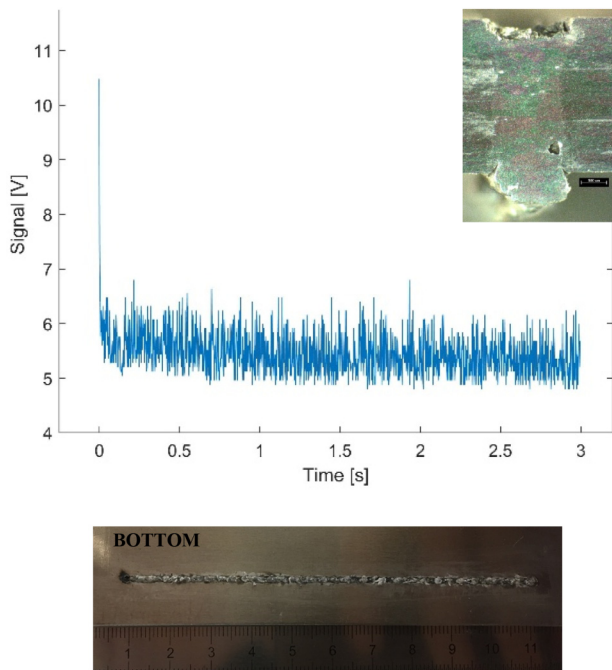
Representative back reflection signal of first category acquired during process compared with the bottom seam. Welding speed = 2.2 m/min and focal position = 0 mm.
